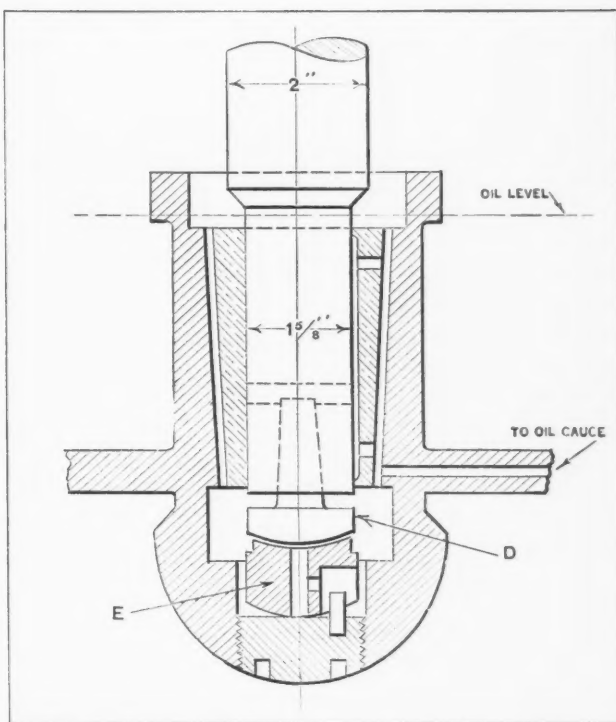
Lower Spindle Bearing and Step Thrust Bearing of Machine Shown in Fig. 1
